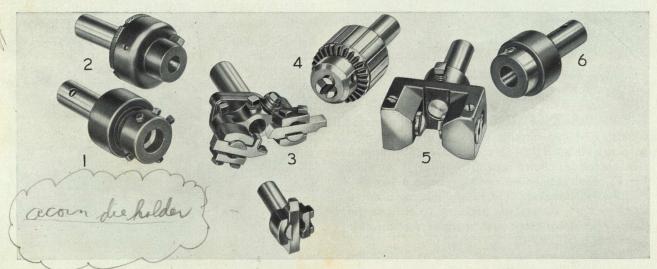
Group of Wade Standard Tools for Use on Hand Screw Machine
